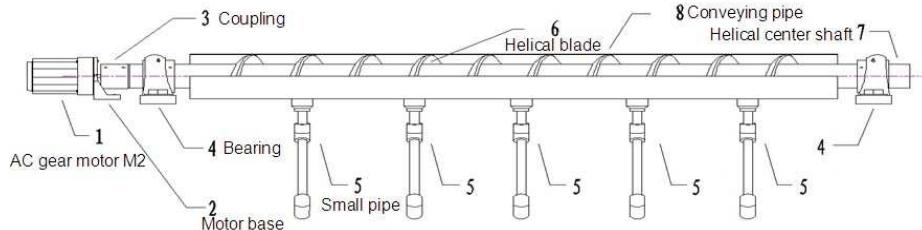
Helical conveyor / 管式螺旋输送装置
